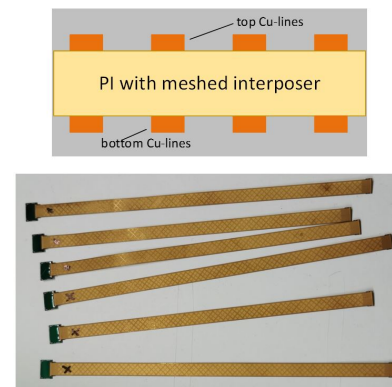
Top: Sketch of symmetric cable layout; bottom: cables are not twisted after soldering on the STS-XYter-chips.
